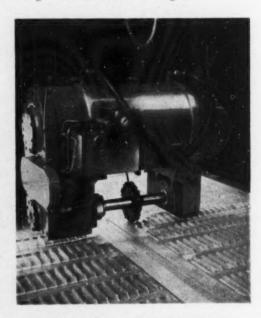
A typical operation is here being performed with the horizontal head of the skin miller, on a panel with a series of integral ribs machined from the solid
